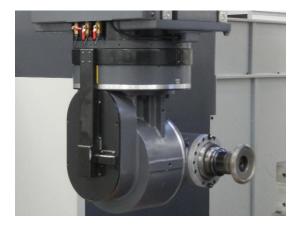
Head with triaxial vibration sensor installed (Sigma SCR-H milling machine)
